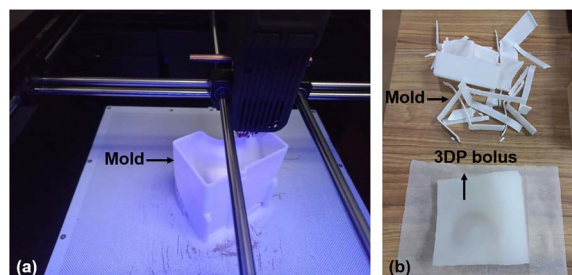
Molds fabricated by 3DP (a) and their resulting boluses using 3DP mold (b).
